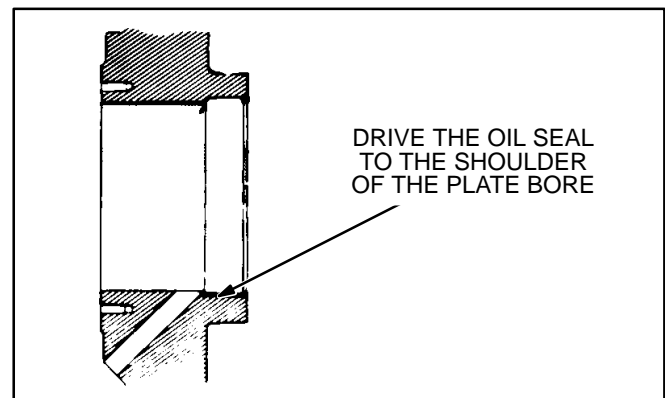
REAR CRANKSHAFT OIL SEAL
